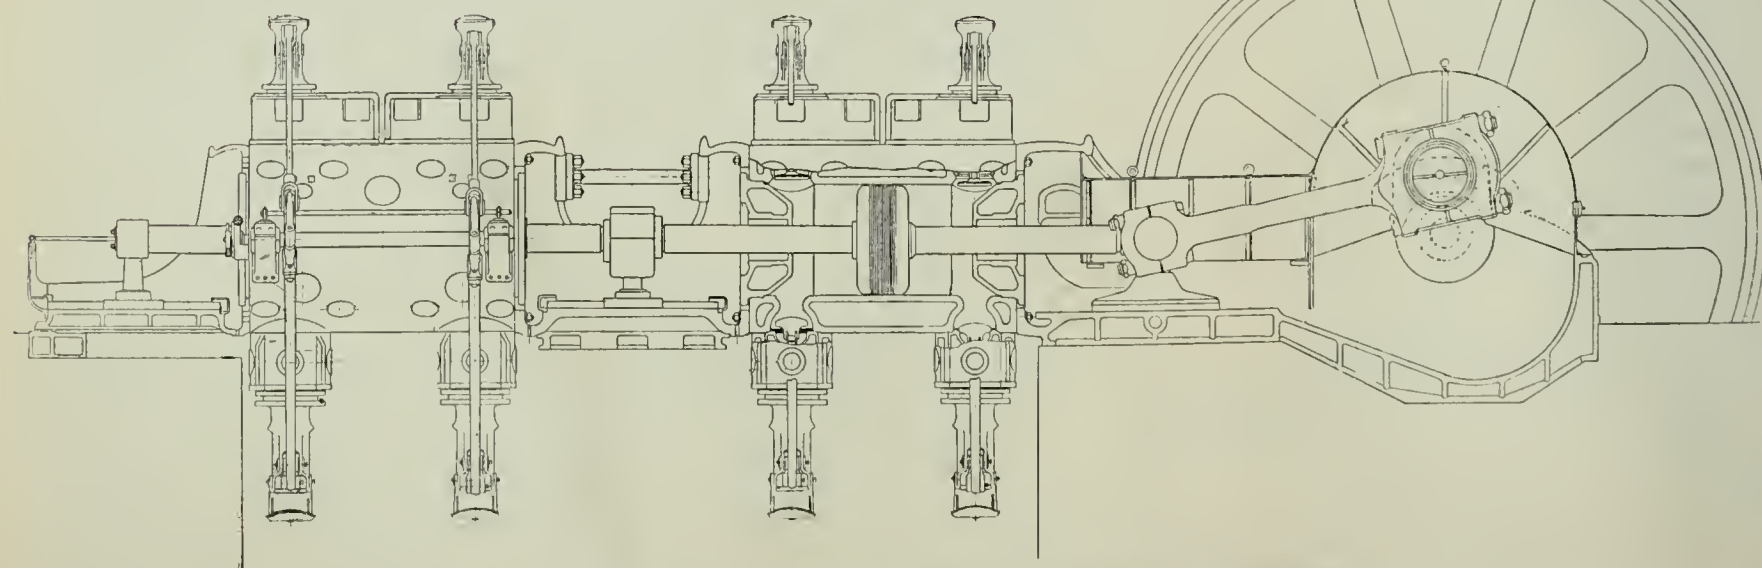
ELEVATION AND PART SECTION OF LILLESBALL GAS ENGINE.
